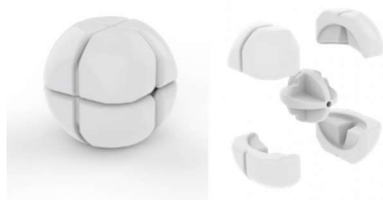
RefluxStop® Device Assembled (left) and in an Exploded View (right)
